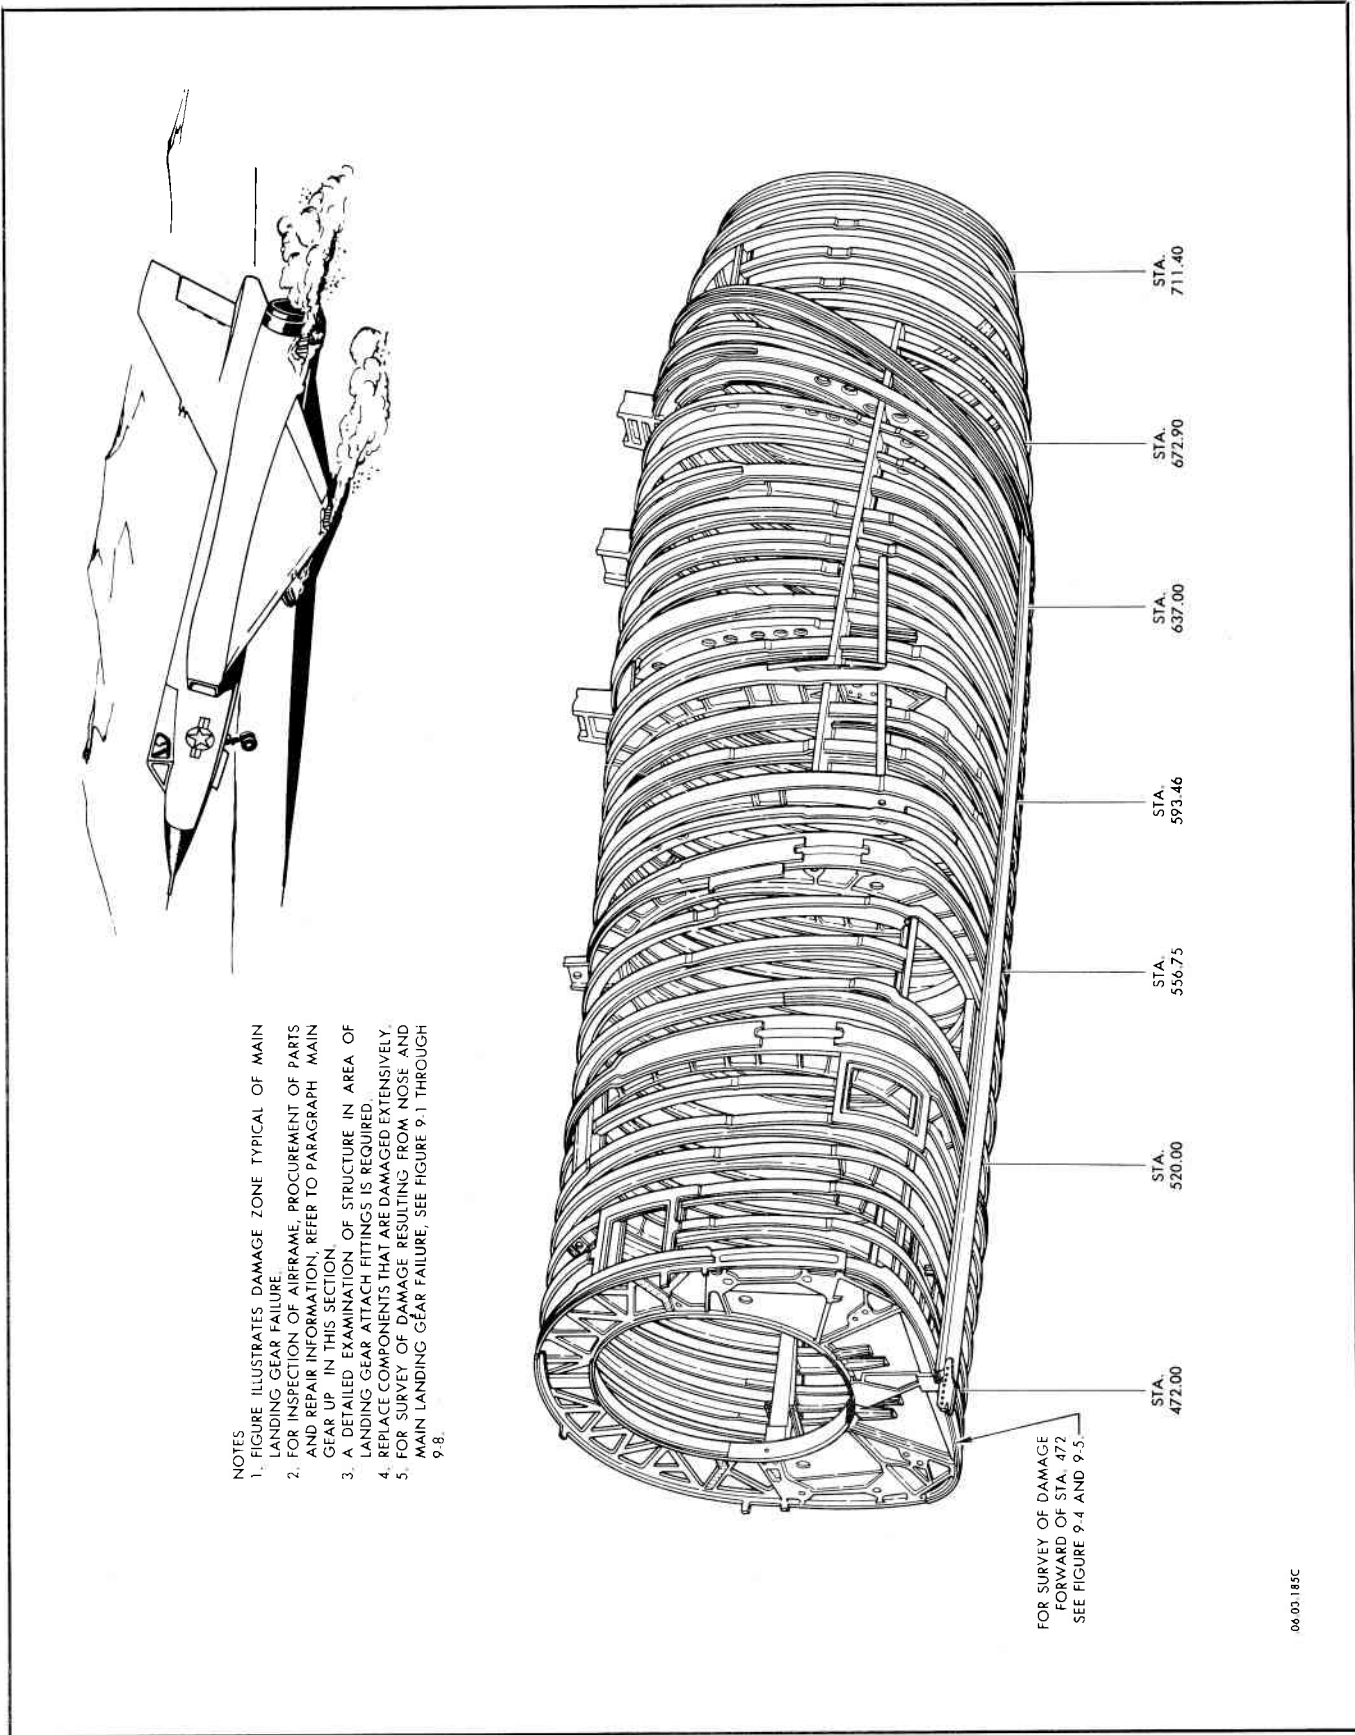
Damage Due to Landing Gear Failure — All Gear Up, F-106B
